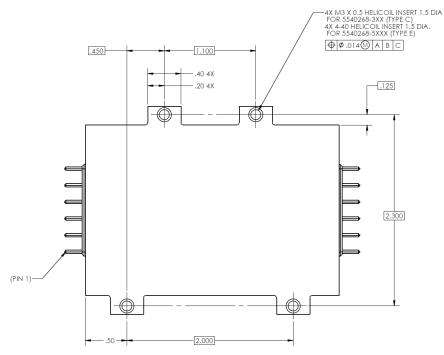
Axial Pins and Thru-hole Tabs Bottom View
